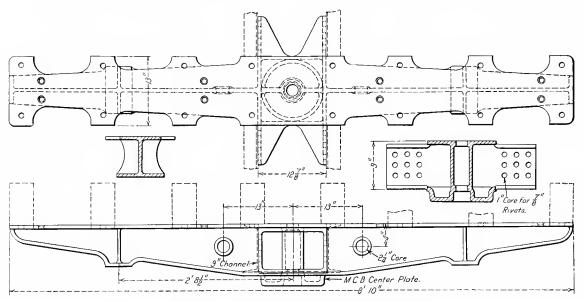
Gould Cast Steel I-Beam Type Body Bolster. Gould Coupler Company.
